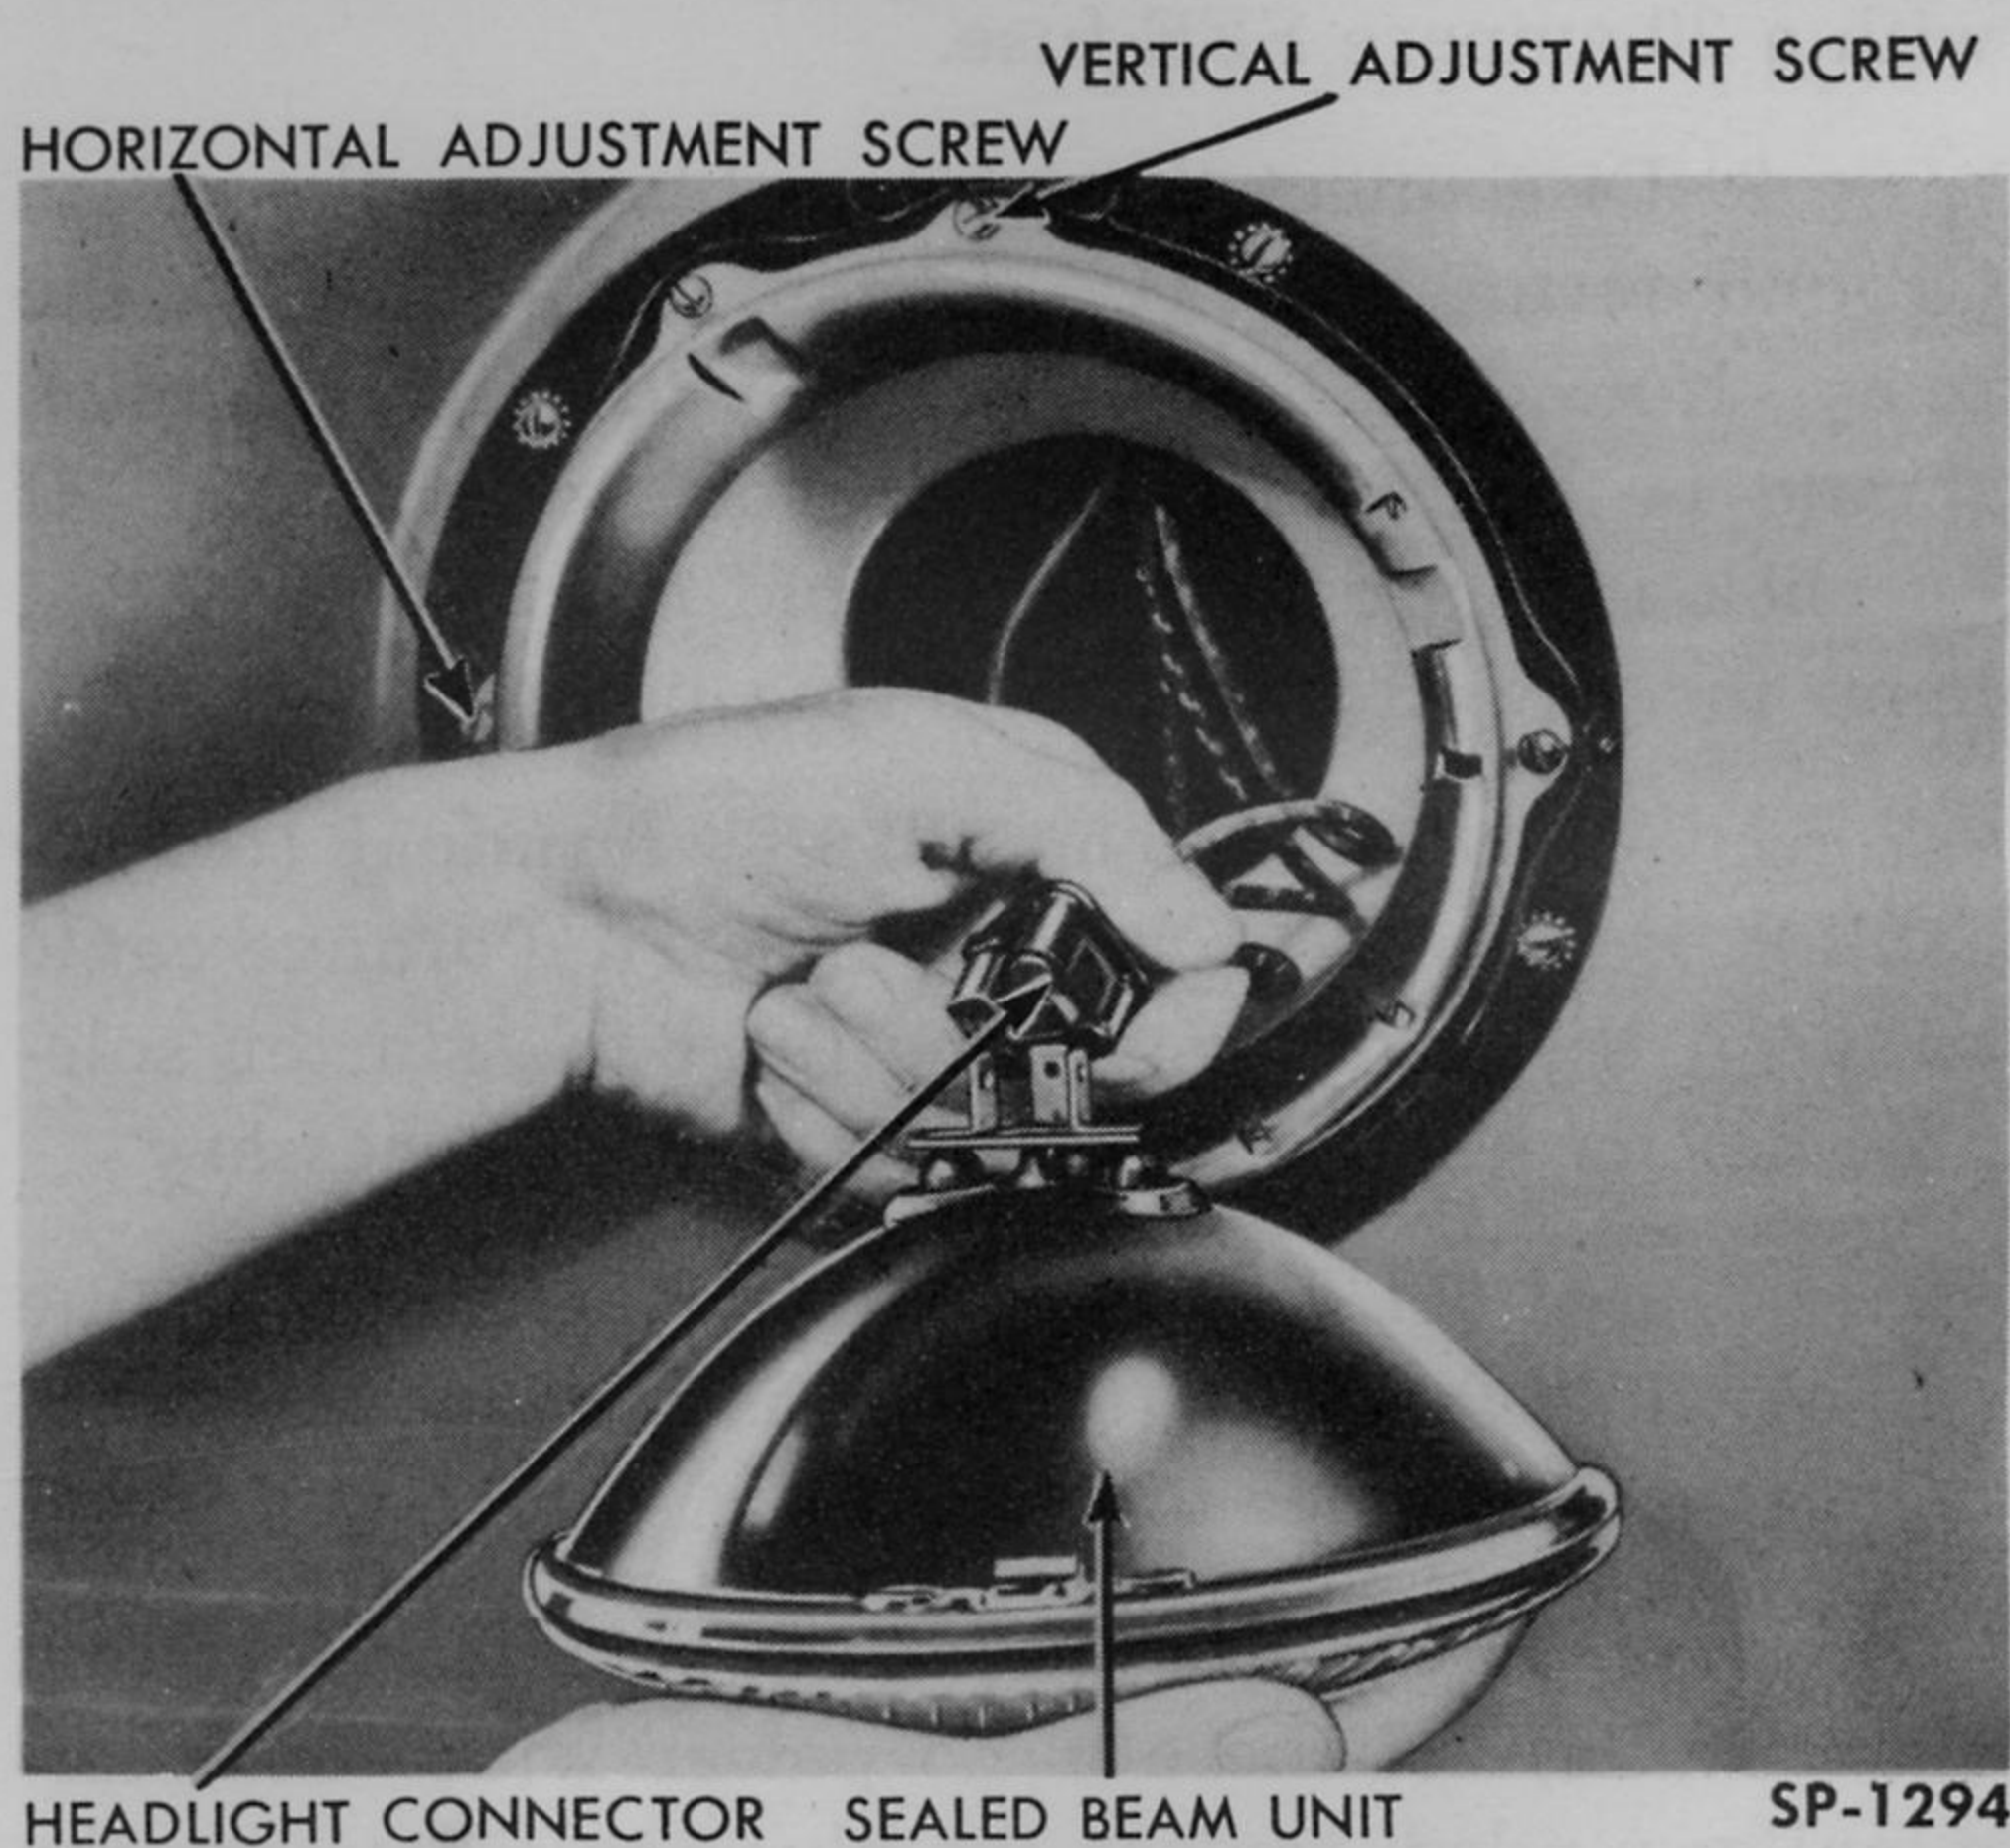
Replacing Frazer Headlight Sealed Beam Unit
